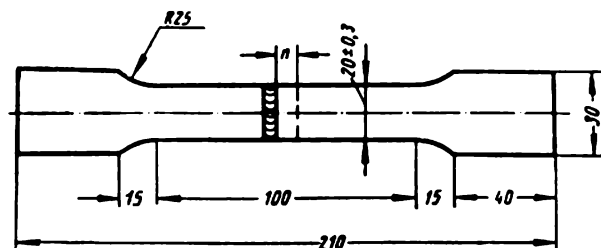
Sketch of a lap-soldered test specimen for testing the shear strength of the soldered joint
